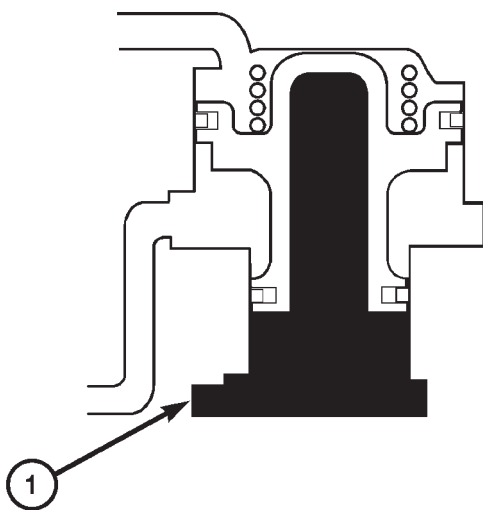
Accumulator in DRIVE - FIRST Gear Position
